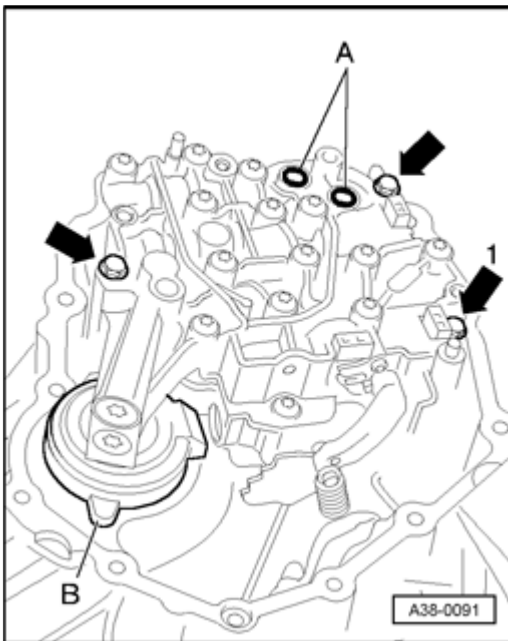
Coating New O-Rings On Hydraulic Control Module With ATF
